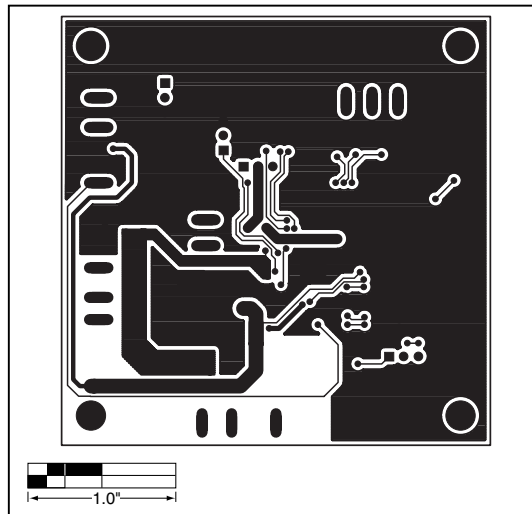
MAX1774 EV Kit PC Board Layout—Solder Side
